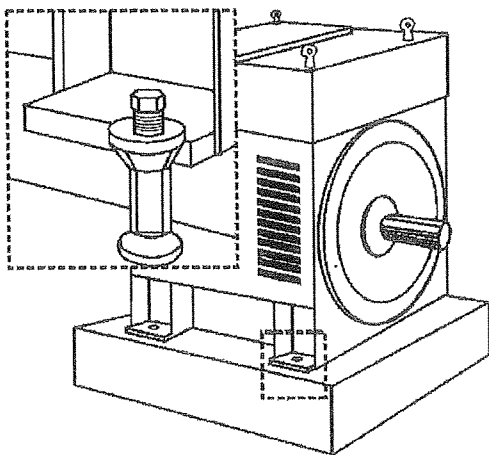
Motor mounted on a concrete base with foundation studs
